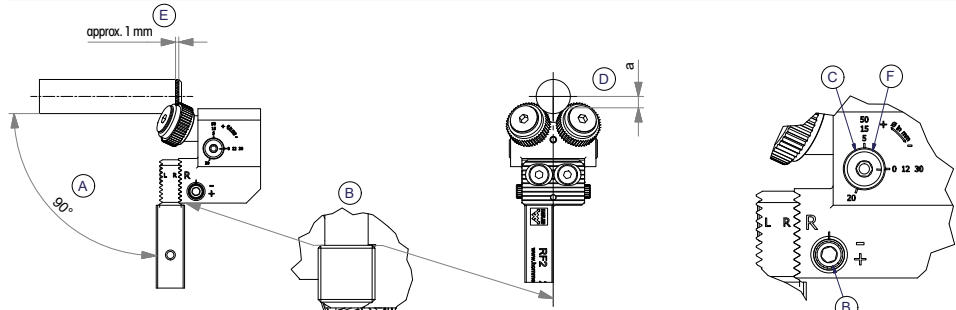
241 Swiss type turning lathe / Tool adjustment
